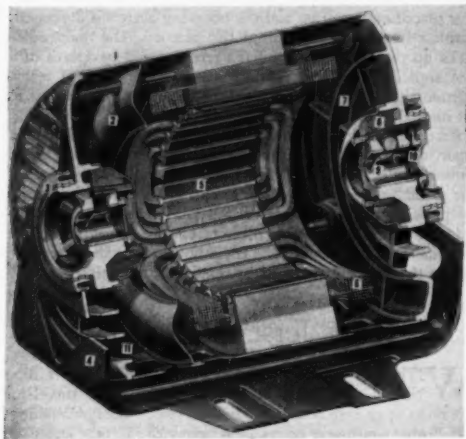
CUTAWAY VIEW OF FORM G MOTOR
